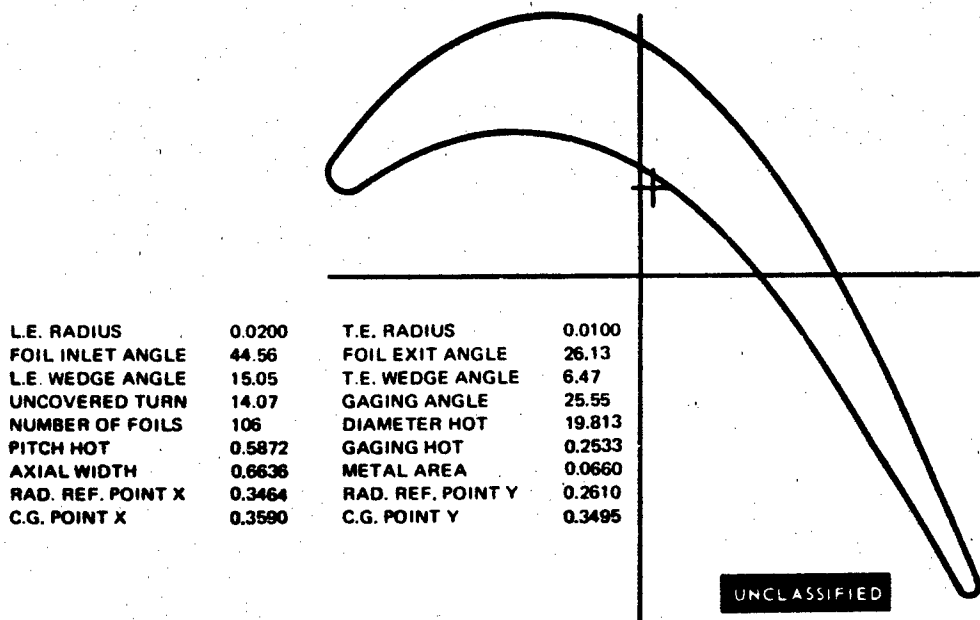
Section D-D, First Blade 1/4 Tip, Cylindrical
